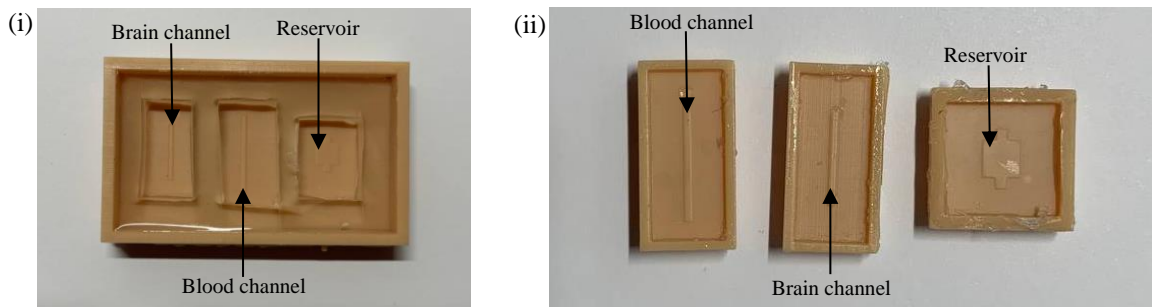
(i) The current mould in which the shape of each layer cut out is uneven. (ii) The original moulds which were too thin but gave the correct layer dimensions. The next mould will be fabricated in a similar manner with an increased depth and volume for the ease of handling and preparation of PDMS mixture.
